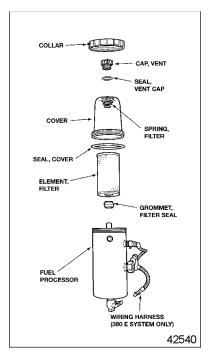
Fuel Pro 382E Fuel Processor Assembly
